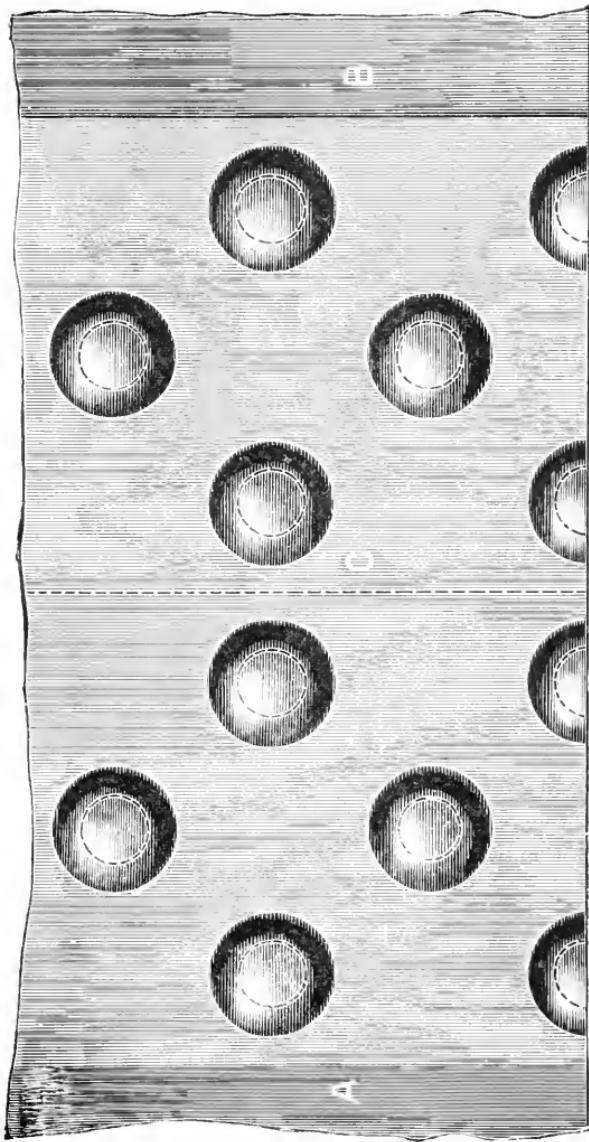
SINGLE RIVETED SINGLE BUTT STRAP JOINT. (Page 30.)
